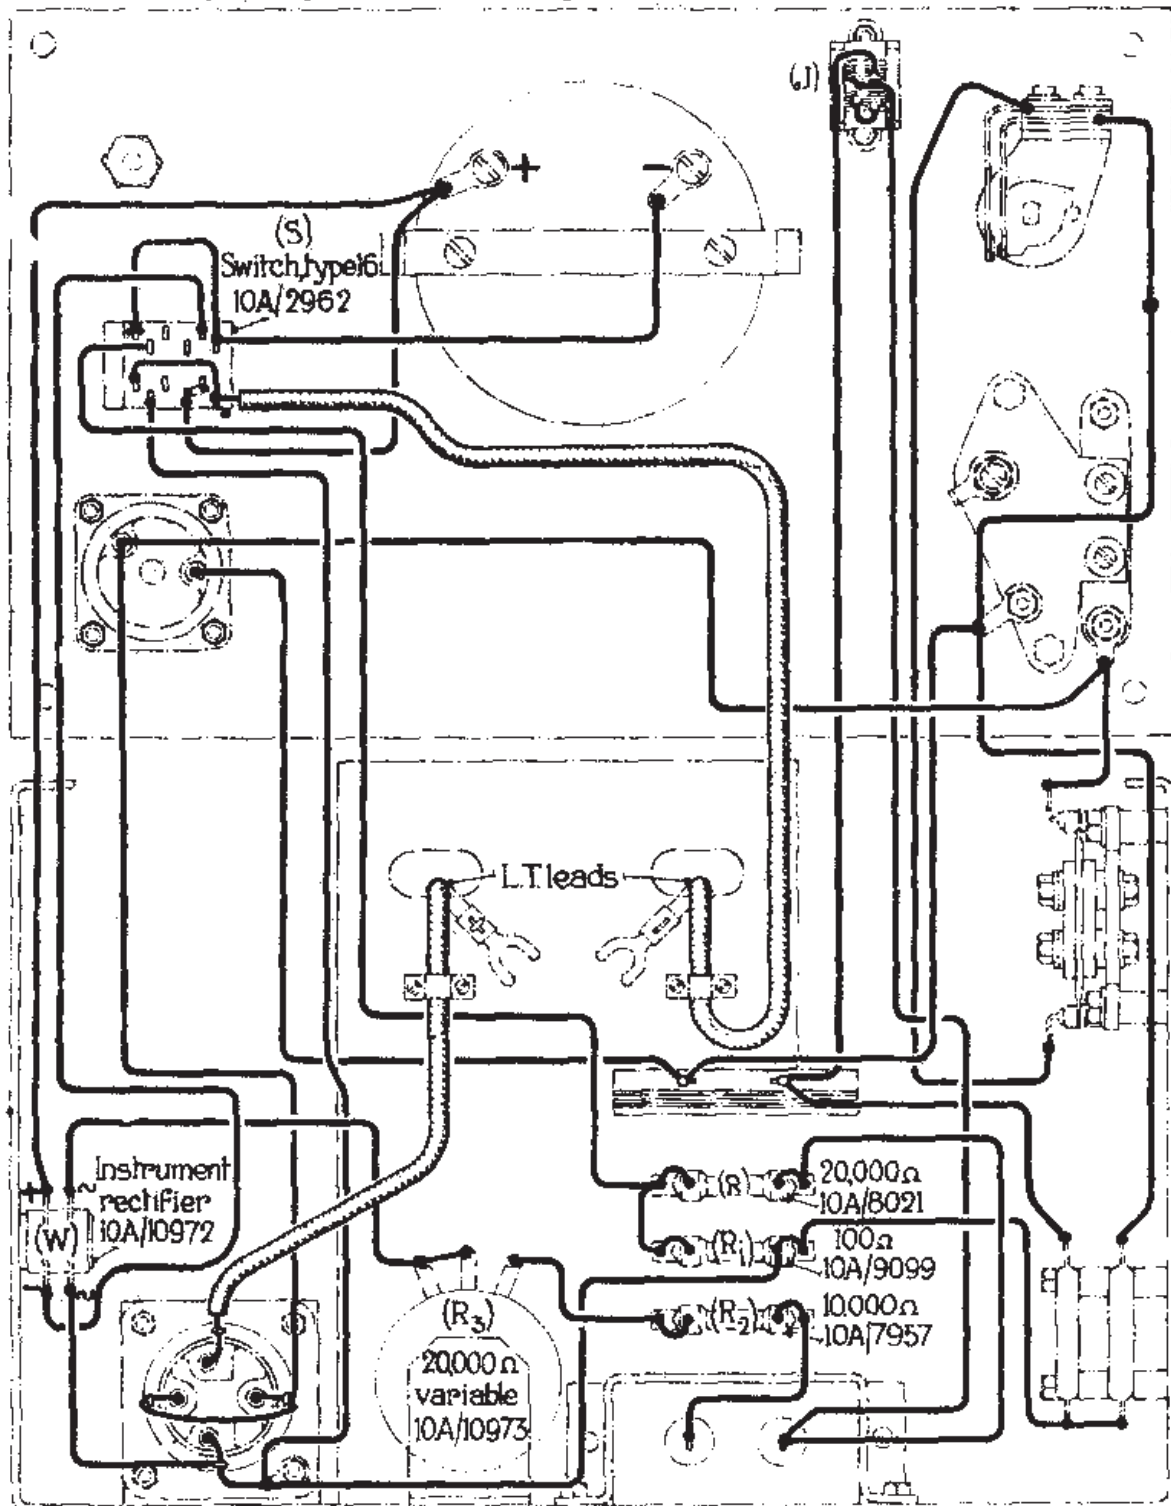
BENCH WIRING DIAGRAM - MODULATION INDICATOR TYPE 2
